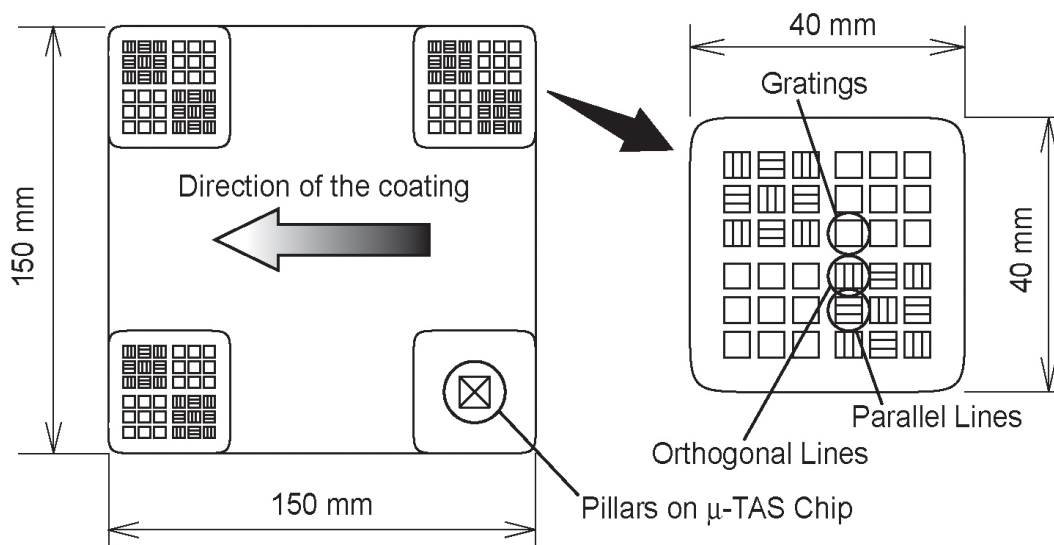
Configuration of stamps mounted on the metal mold.
